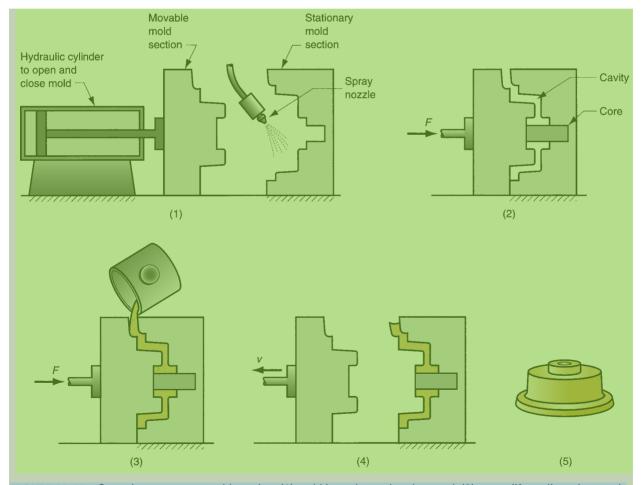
Steps in permanent-mold casting: (1) mold is preheated and coated; (2) cores (if used) are inserted, and mold is closed; (3) molten metal is poured into the mold; and (4) mold is opened. Finished part is shown in (5).
